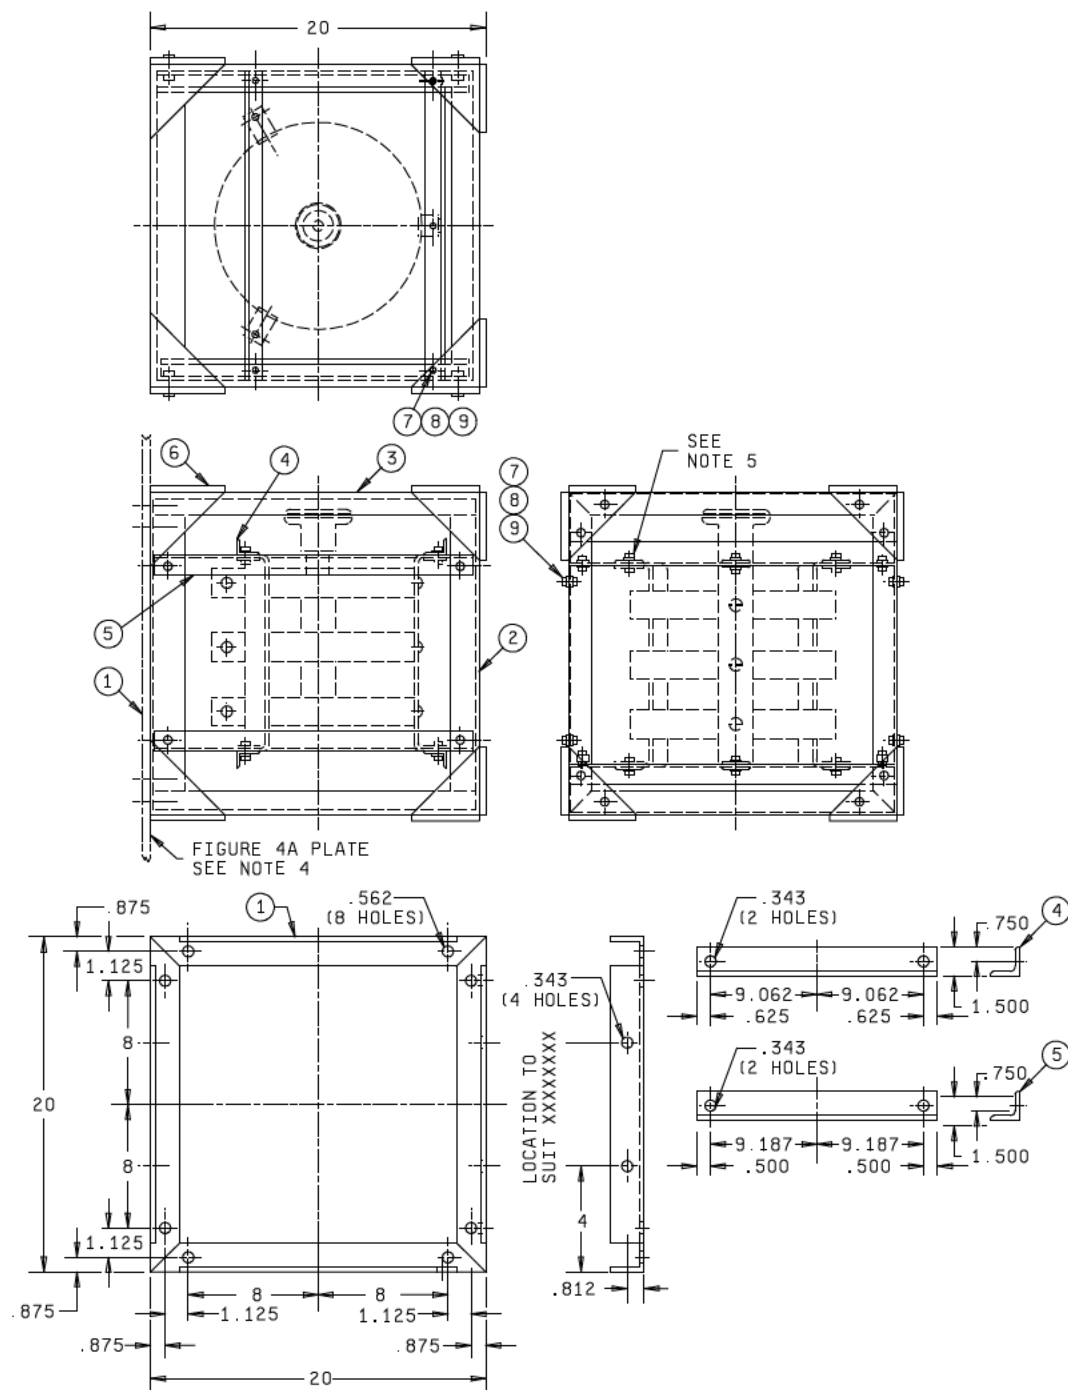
Standard mounting for shock testing double end supported multi-deck plate type rheostats, type A test - lightweight equipment.
